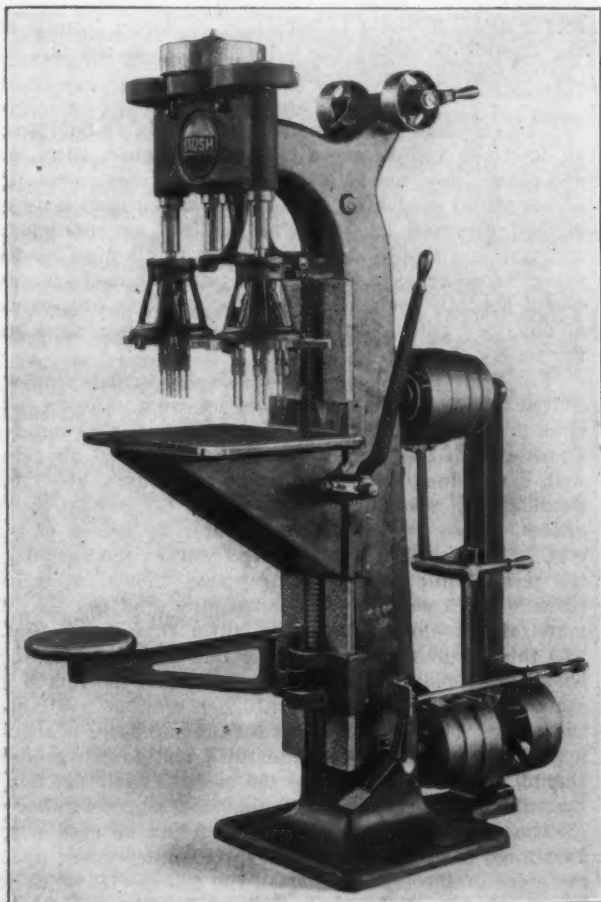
The No. 3-A Three-Spindle Sensitive Drill Built by the Baush Machine Tool Company, Springfield, Mass.
